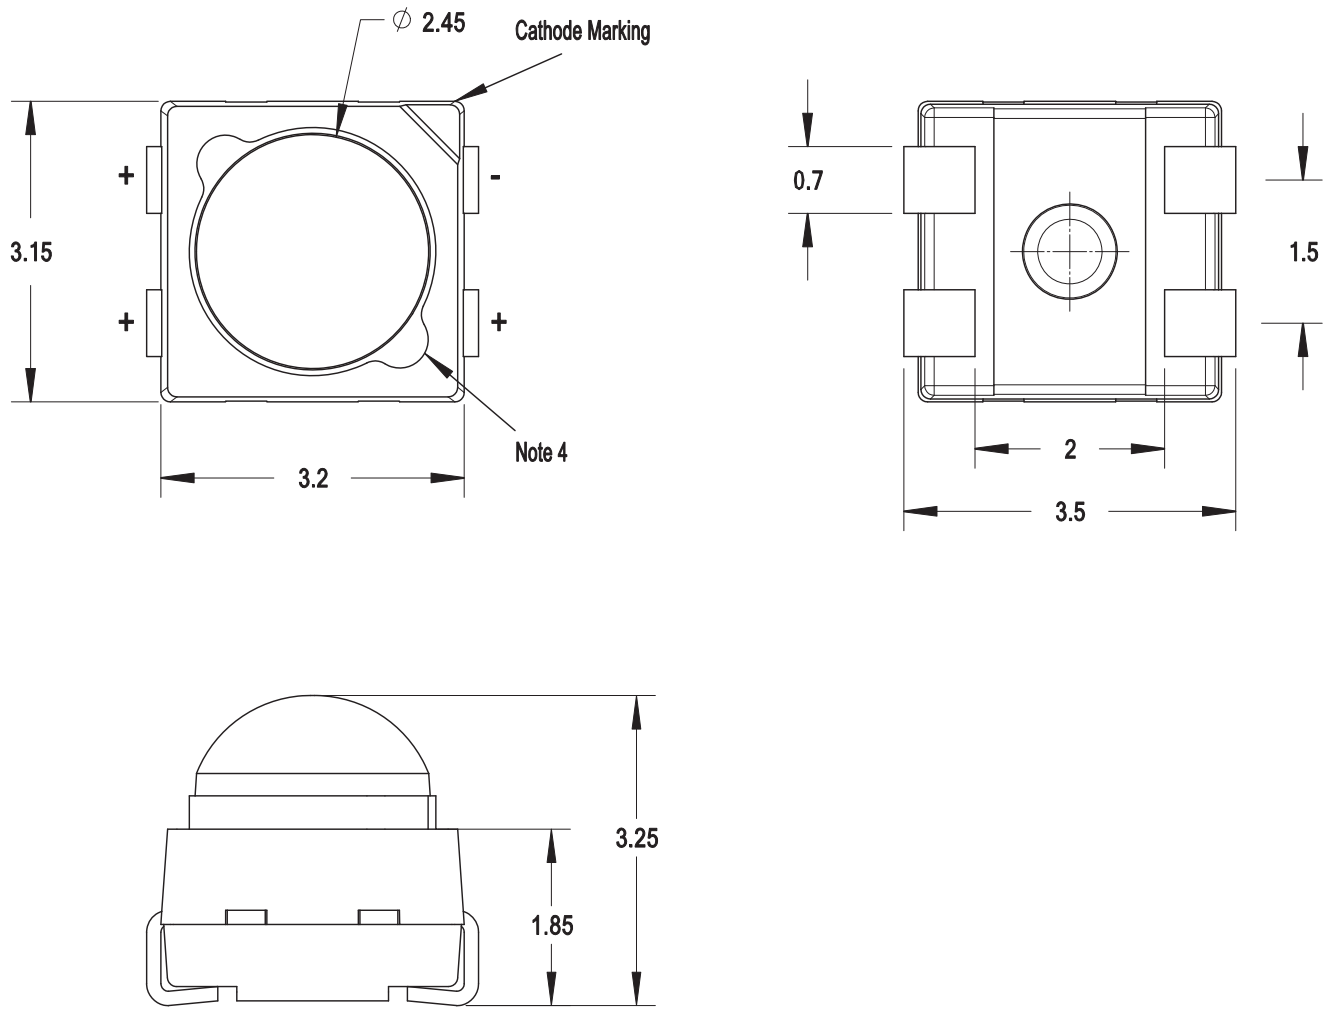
Package Drawing for Black Outer Appearance (BOA) ASCQFx60 Series
